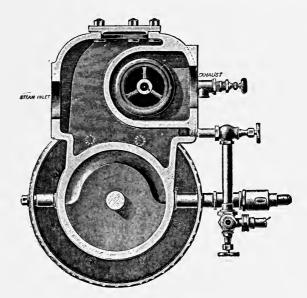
Cross-section. Cylinder, Dick and Church Engine.
